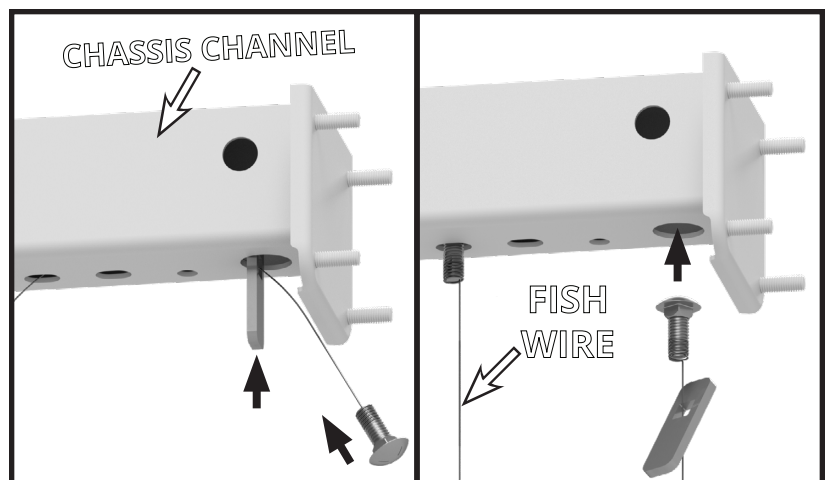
VIEW OF PASSENGER SIDE CHASSIS CHANNEL
